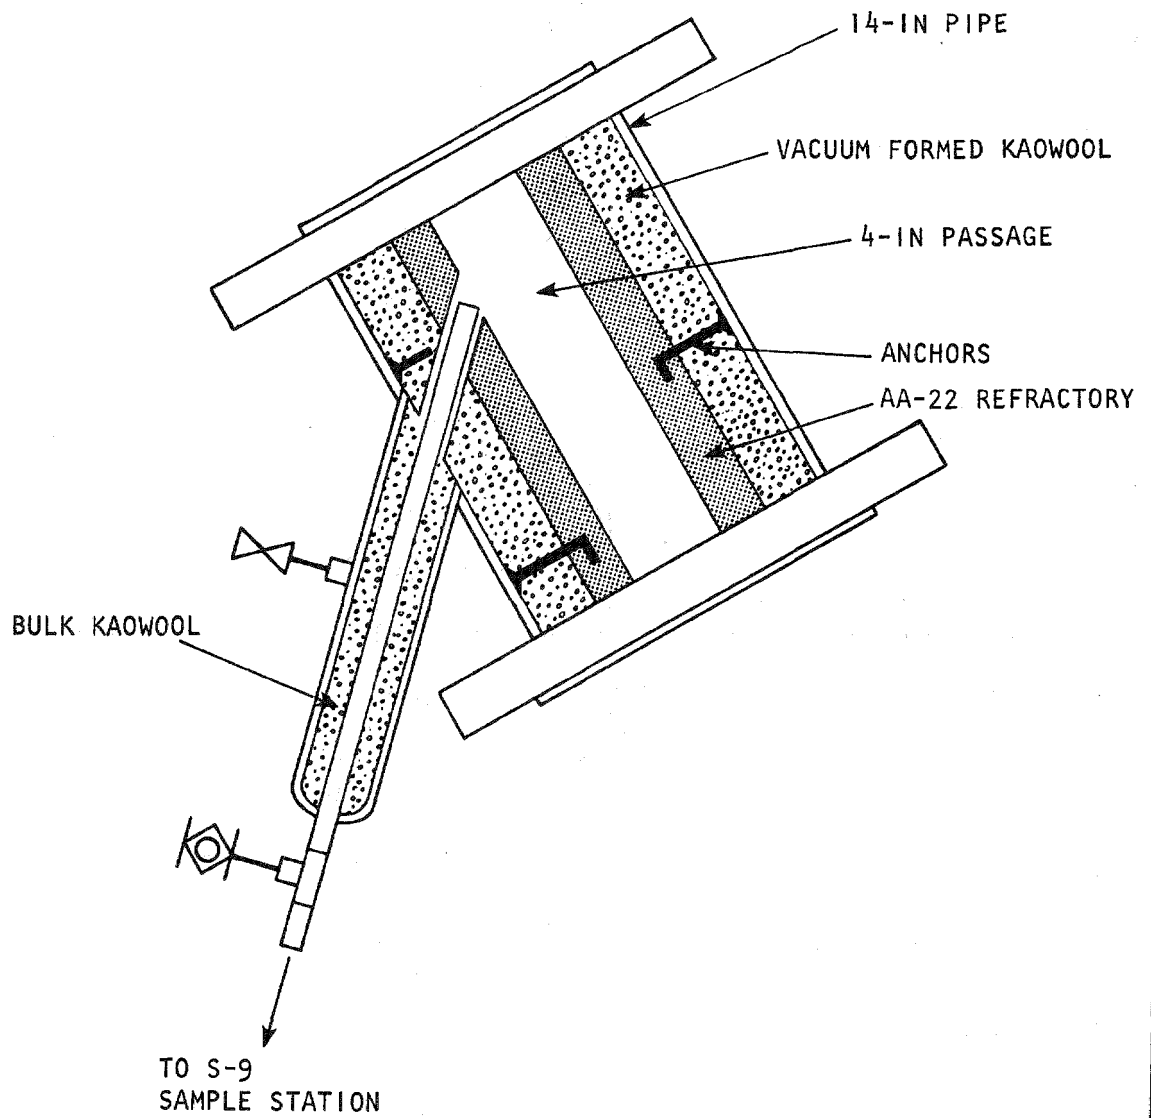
ORIGINAL SPOOL PIECE ON OVERHEAD ACCEPTOR TRANSFER LINE (CD-206) WITH CONNECTION FOR S-9 SAMPLE POINT
